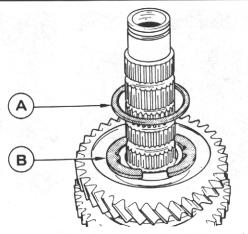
Thrustwasher retaining circlip (A) and thrustwasher halves (B) – B type gearbox (Sec 7)
